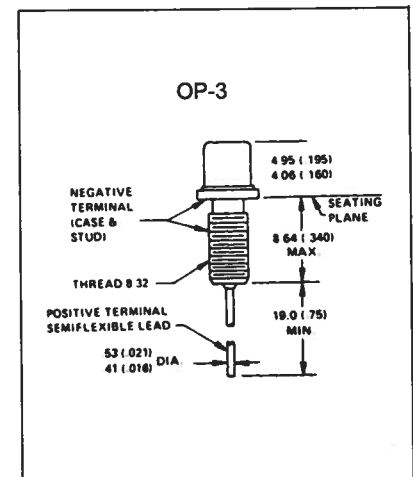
AVX-S3 input assembly (for OP-3 package)
